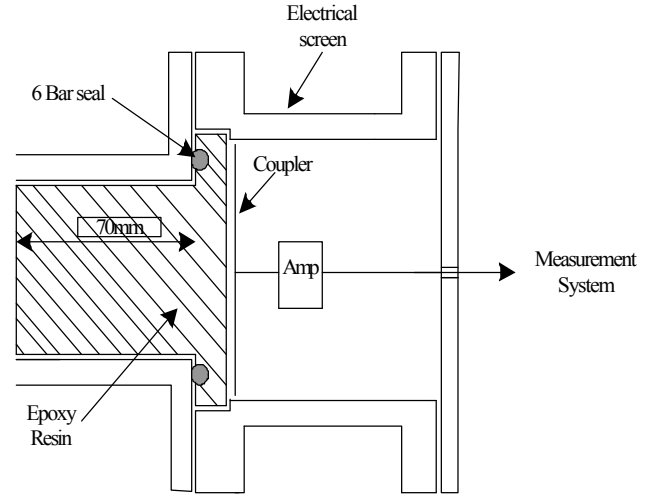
Epoxy resin plug and external UHF coupler mounting.
